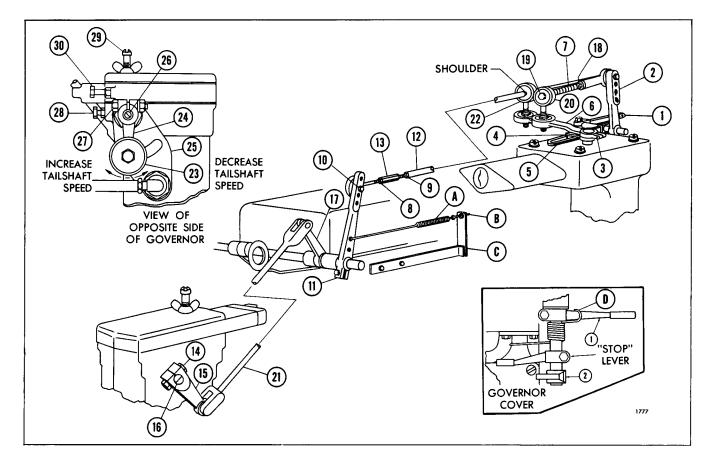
Hydraulic Output Shaft Governor and Linkage (With Keyed Levers)
